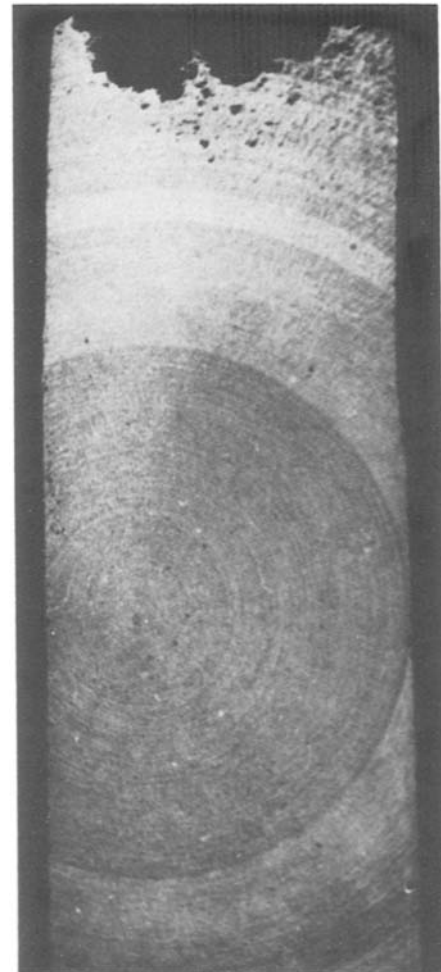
Macrophotograph of longitudinal section of aluminium alloy-mica particle composite casting; poured in sand mould with water-cooled copper chill at the bottom ( $\times 0.85$ ).
